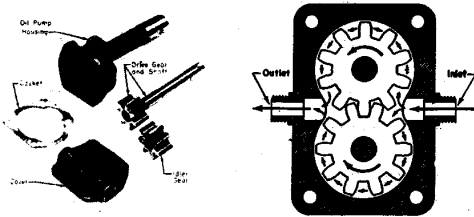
In the gear type oil pump, the gears function like impellers and force the oil to the engine bearings.
